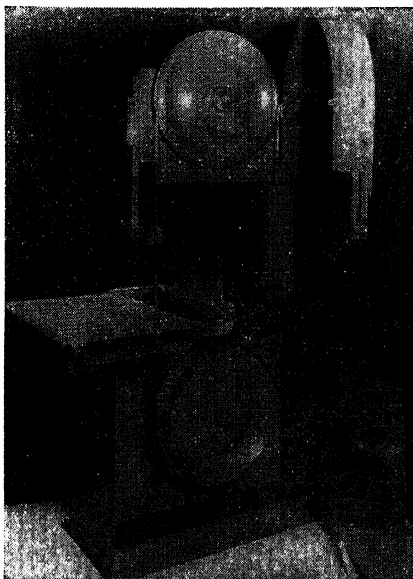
Meat and fish slicer of arc welded steel construction.
